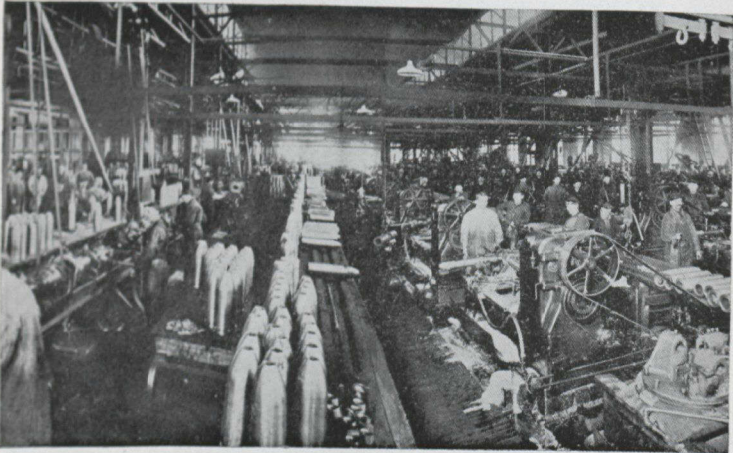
Steel & Radiator Co's., 6 in. Shell Shop, King Street Plant.
